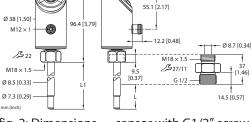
Dimensions — sensor with G1/2" screwin adapter
